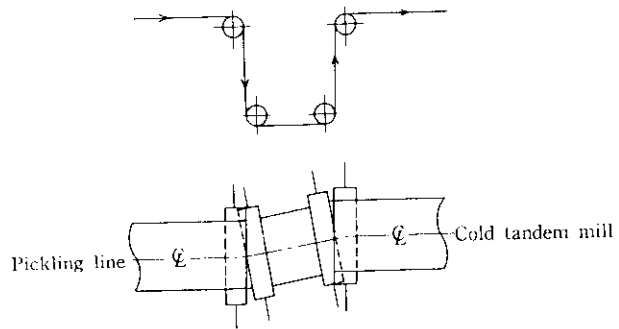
Strip shifting device for coupling of pickling line and cold tandem mill
